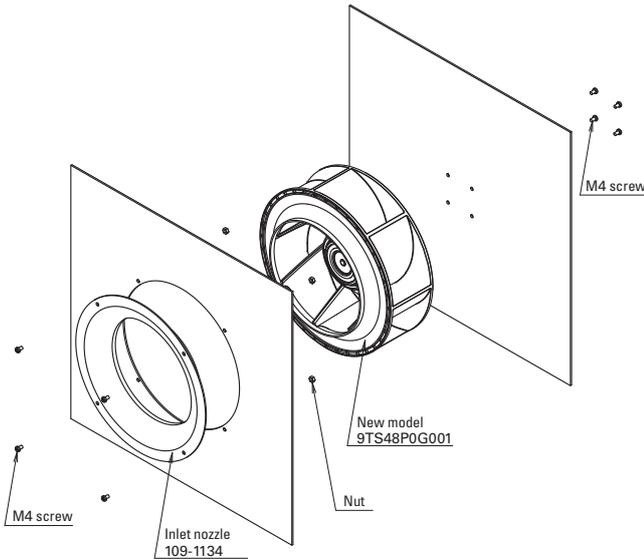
An example of mounting the inlet nozzle on the "San Ace C225" 9TS type
